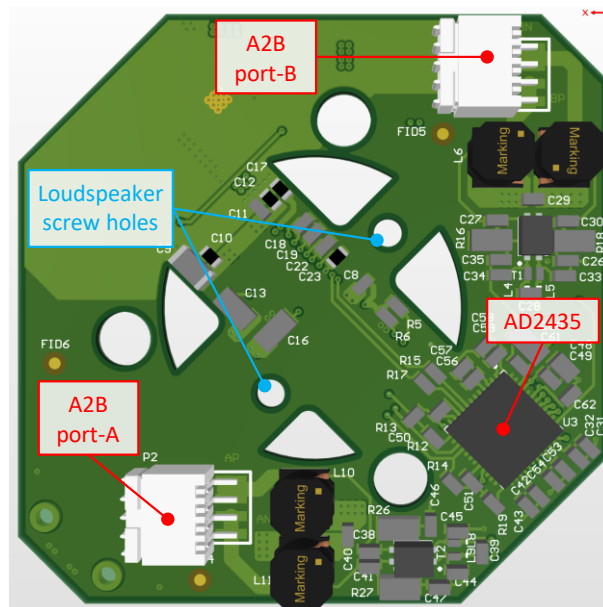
3D model of the amplifier board (bottom view) with highlighted the main components and mechanical parts.
